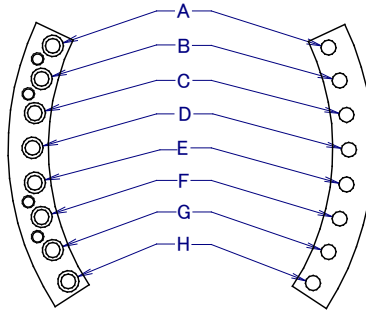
(a) Mounting the J1-axis adjustable mechanical stopper (option)
